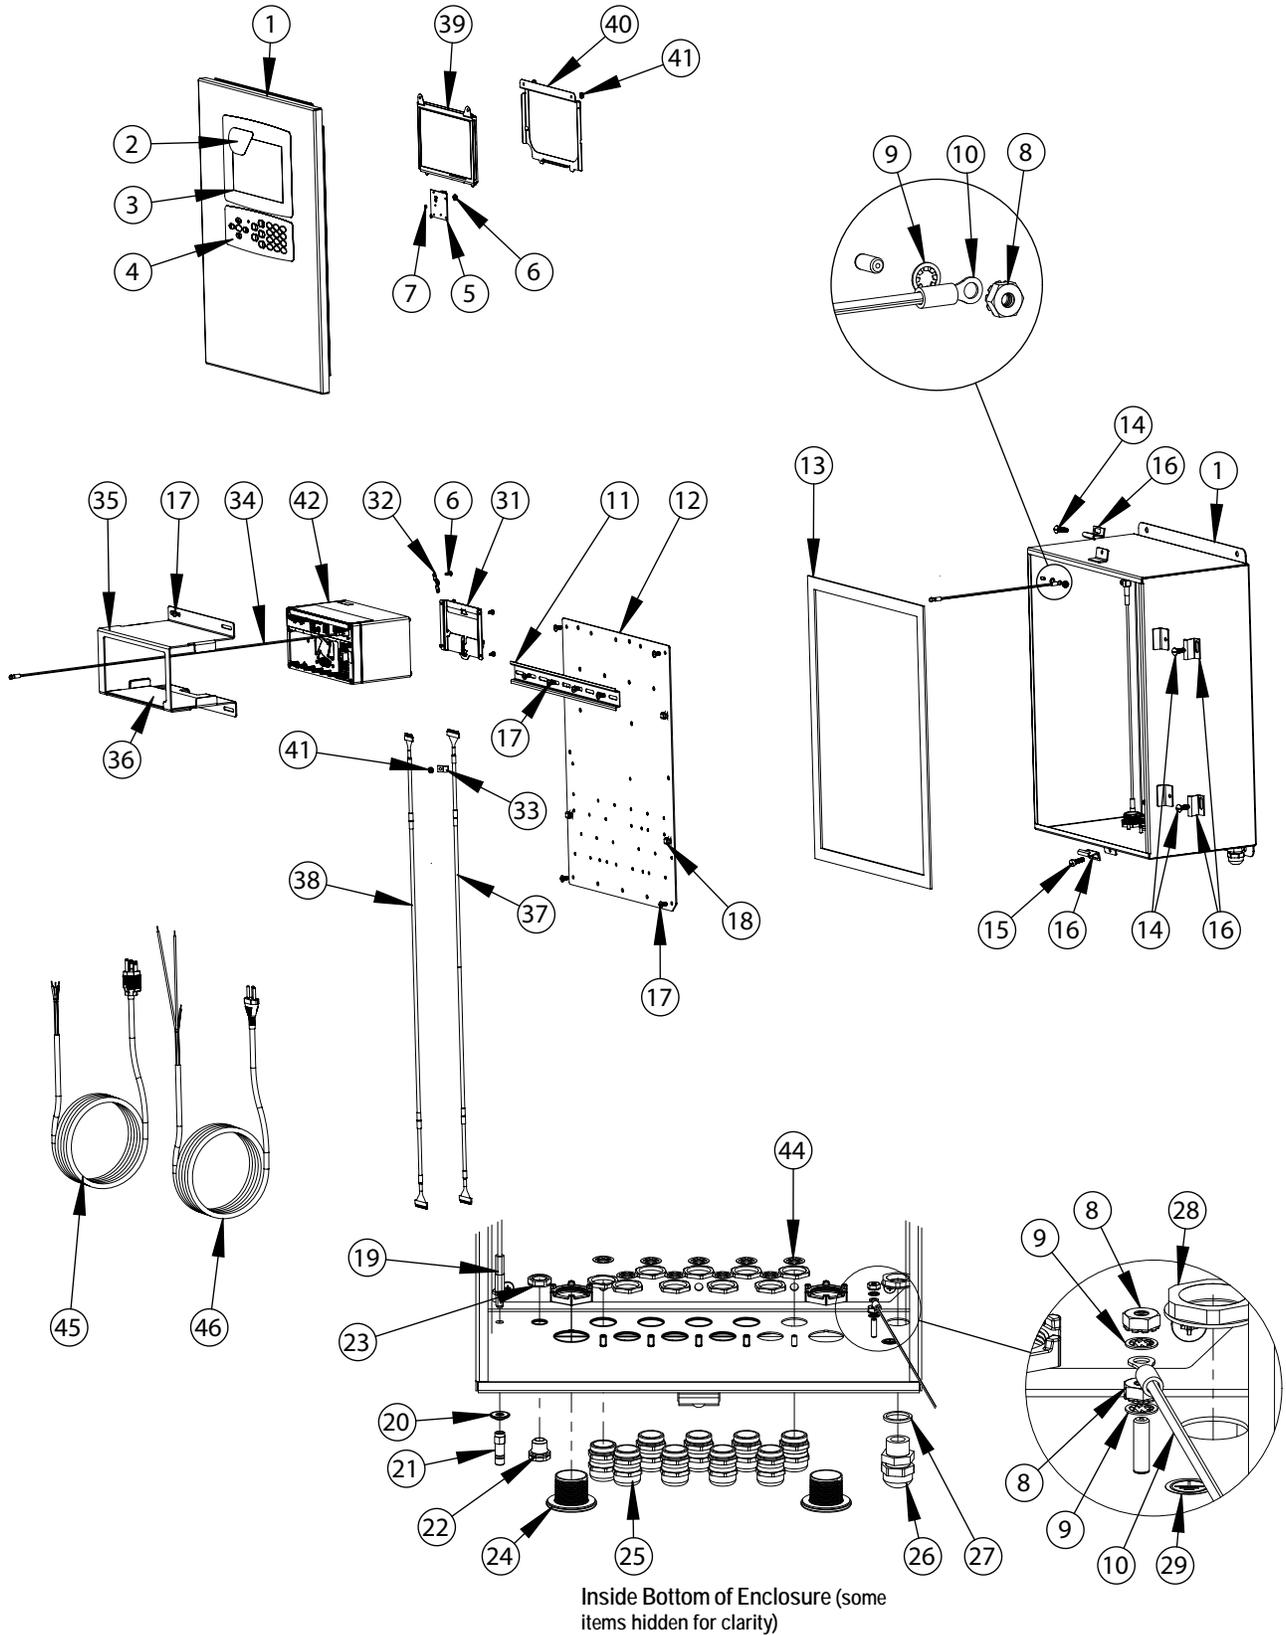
Replacement Parts Drawing - Wall Enclosure
